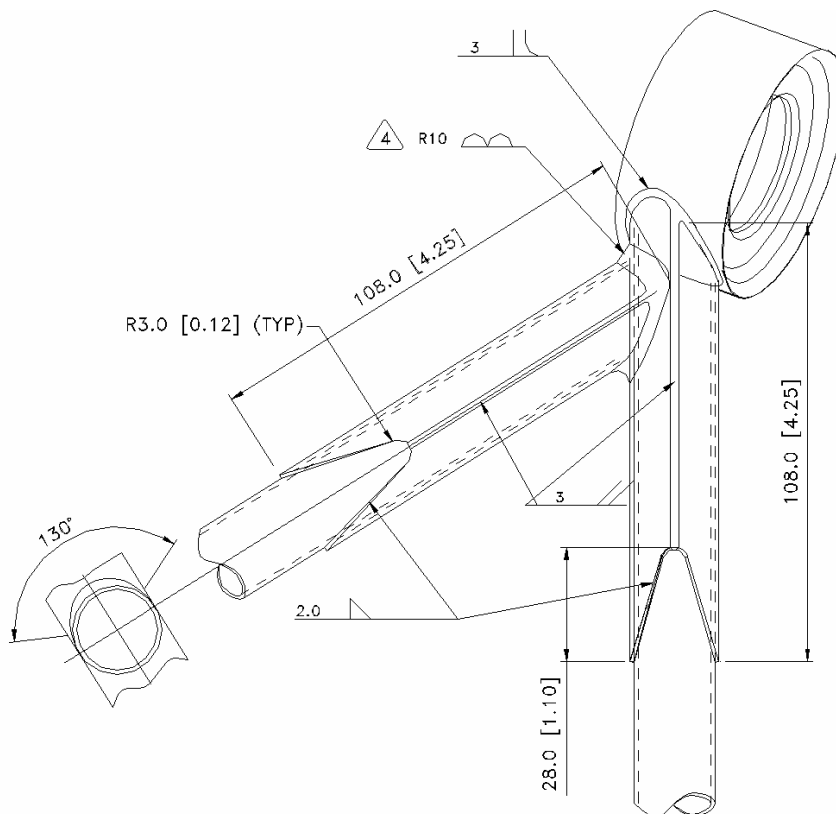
Outer Split Sleeve Repair welded over cracked area.
